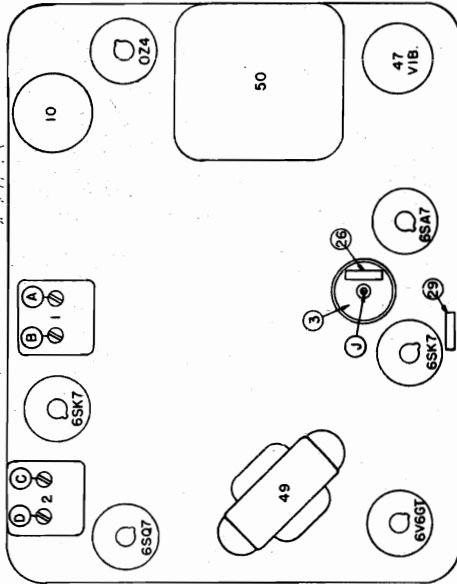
PARTS LAYOUT--DASH UNIT--Top View
